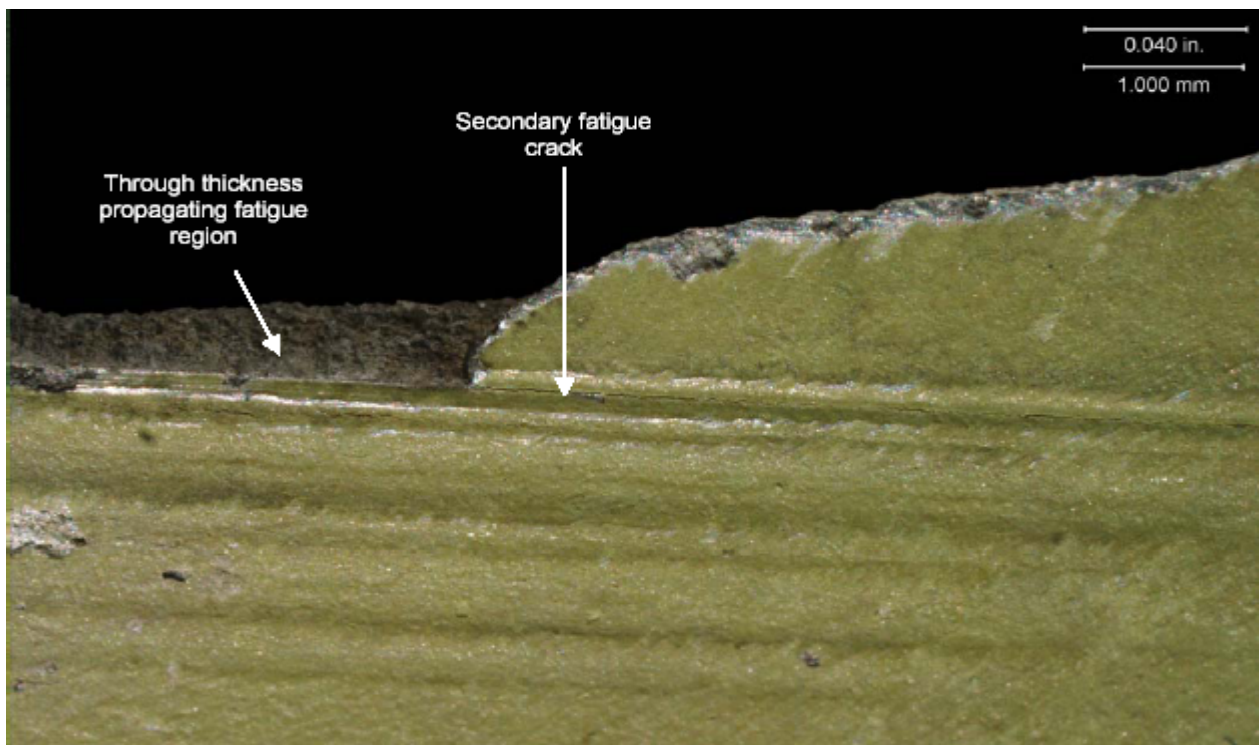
Surface of skin faying with repair doubler between hole 29 and hole 30 showing the longitudinal scratches in relationship to this fatigue crack. Note the secondary crack extending out of this common scratch.
